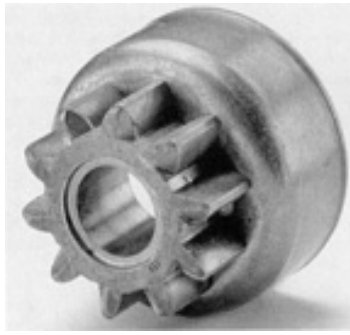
Resistance projection welding application joining an intermediate density P/M spur gear to a low-carbon wrought steel stamping
